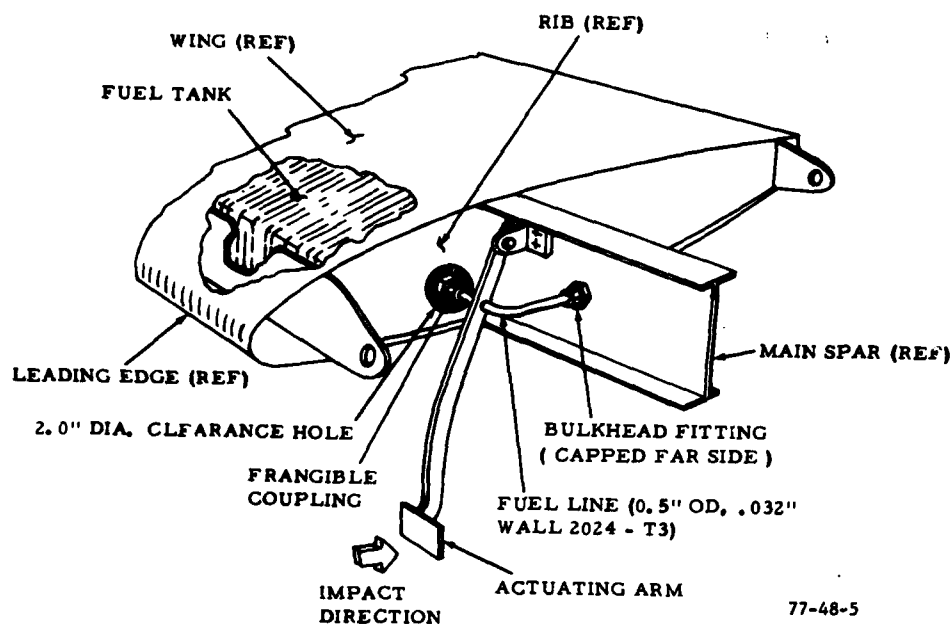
TYPICAL FRANGIBLE COUPLING INSTALLATION (WING ROOT)
